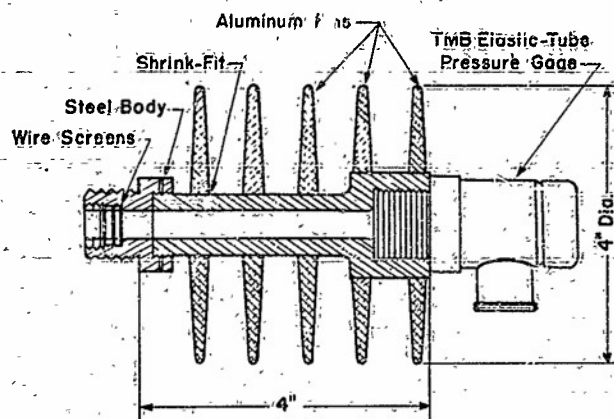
Convection Radiator for Use with Elastic-Tube Pressure Gage
